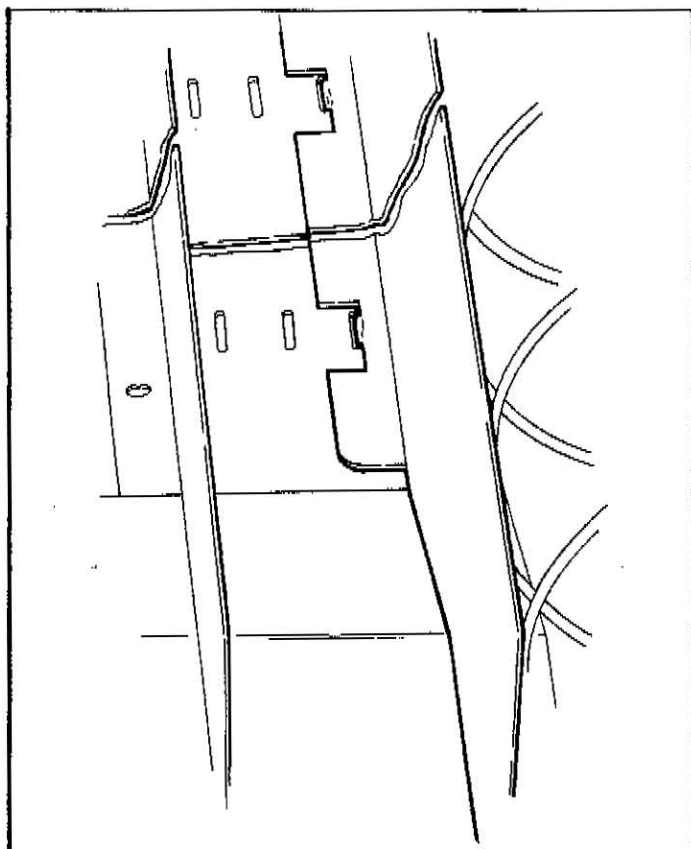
ALIGNMENT OF MOVEABLE PRODUCT SPACERS.
